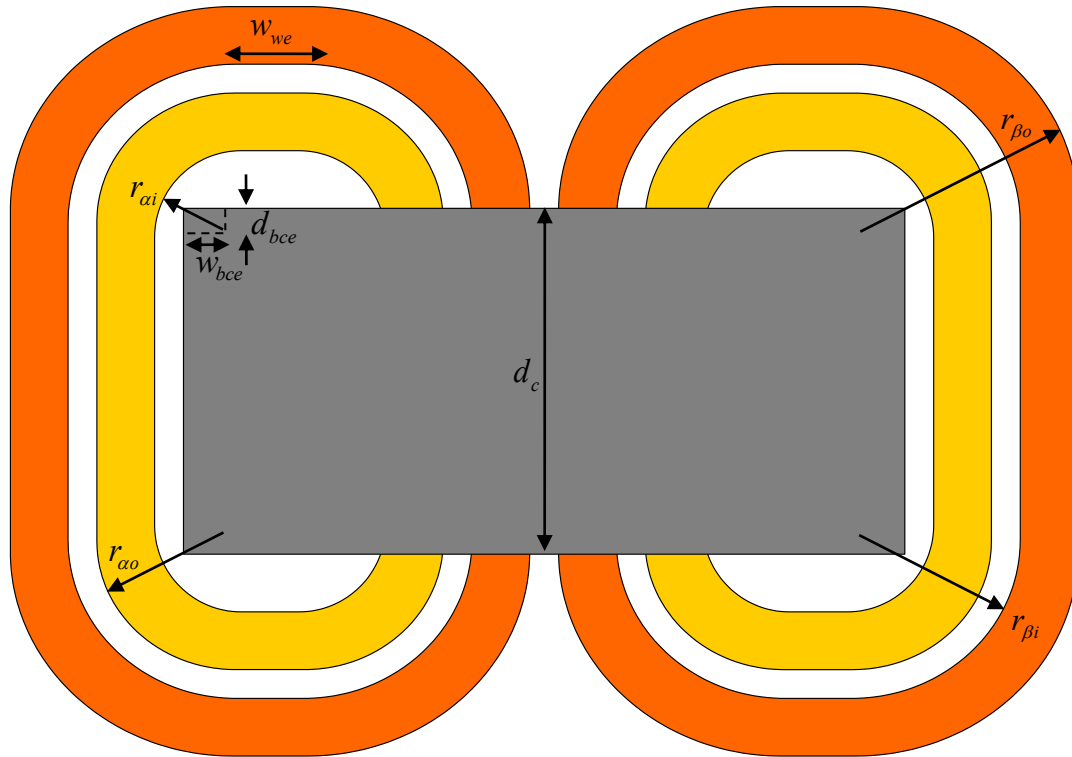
Top Cross-sectional View of Tape-Wound Transformer
